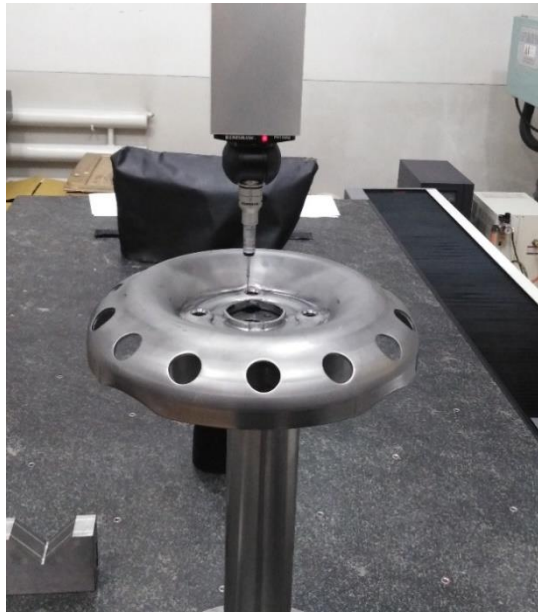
GSV-EM 14, i.e. Cobalt light car disc part measurement process on coordinate measuring machine.
